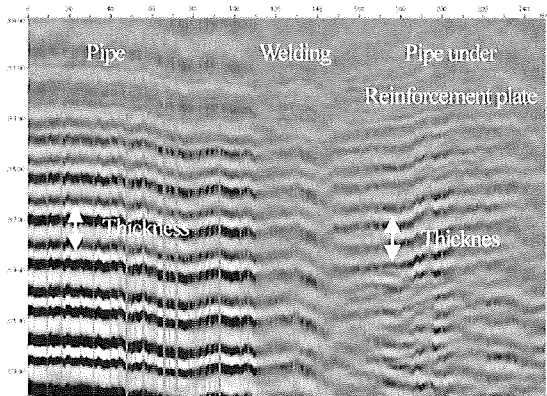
B-scan from pipe specimen with reinforcement plate around the nozzle (before grinding)
